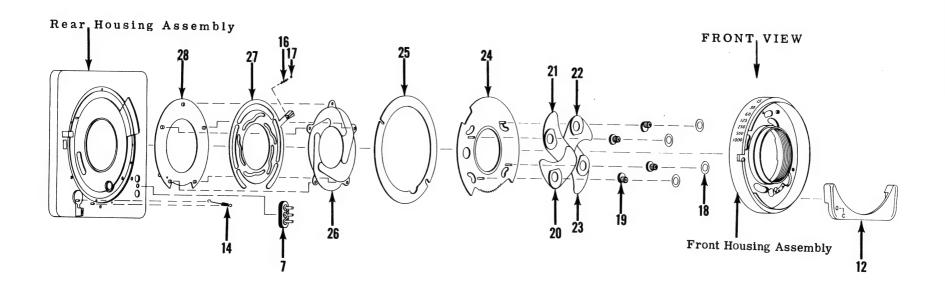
SHUTTER ASSEMBLY - FIRST (Model 2B)
